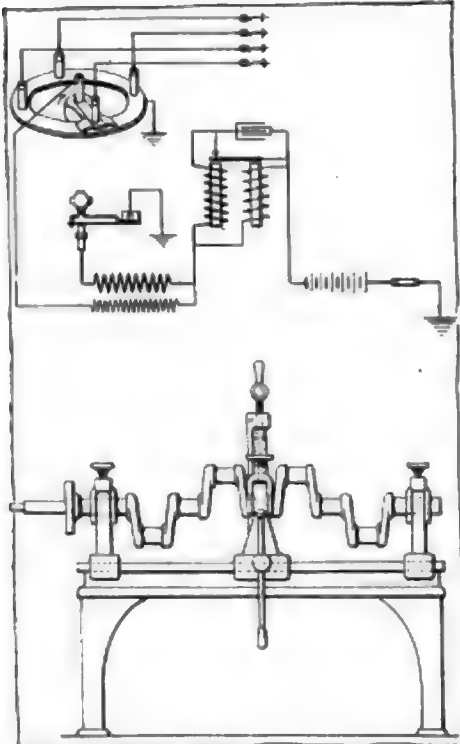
DELCO IGNITION SYSTEM AND PAINE SHAFT STRAIGHTENER
